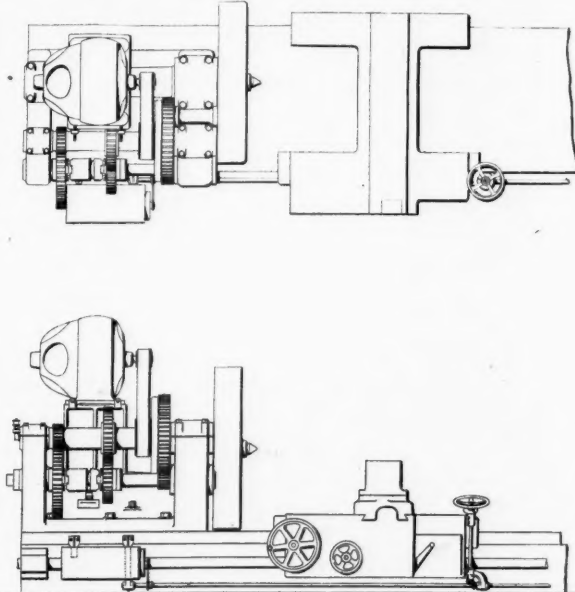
General View of 60-in. Engine Lathe After Application of Motor Drive.
